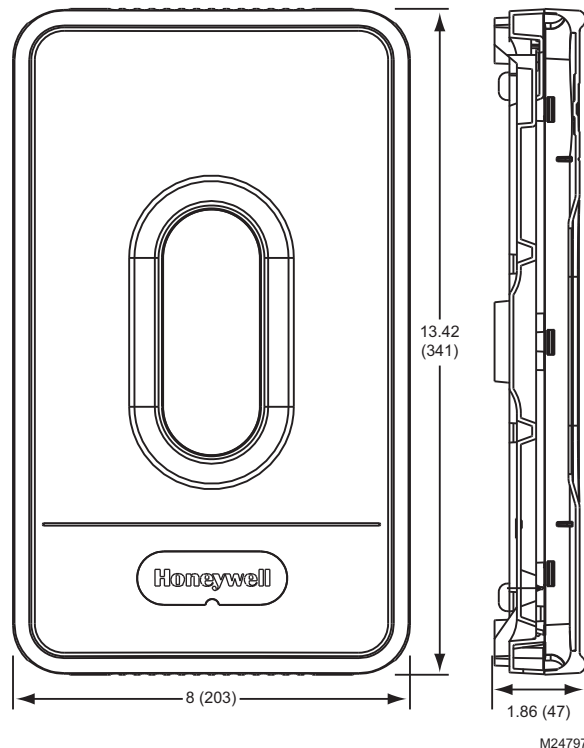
HZ432 TrueZONE panel dimensions in in. (mm).
